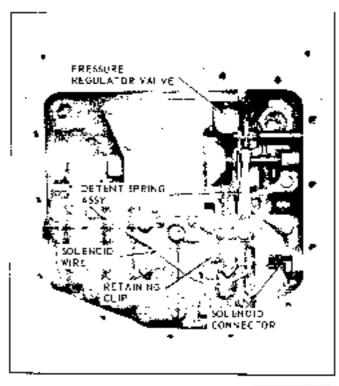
F-25 Transmission - Oil Paniend Streiner Removed
